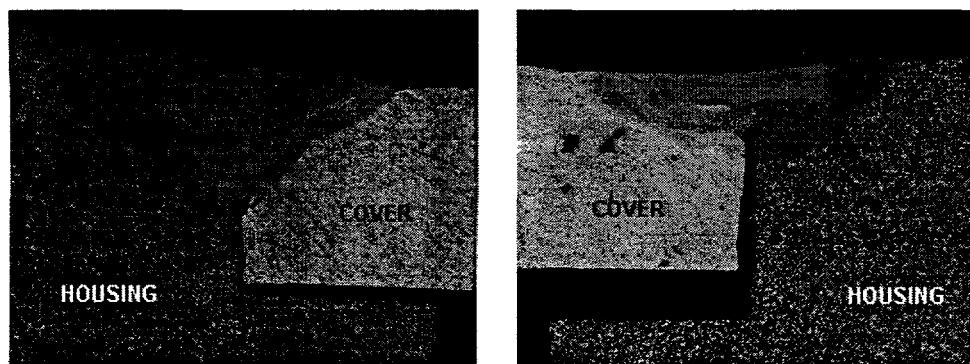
Weld Joint Geometry for Each of the Hardware Components
